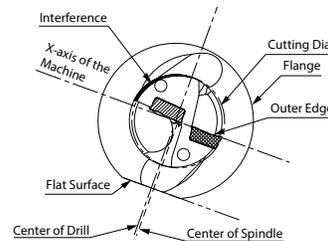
Excessive Offset (For Smaller Hole Diameter)
